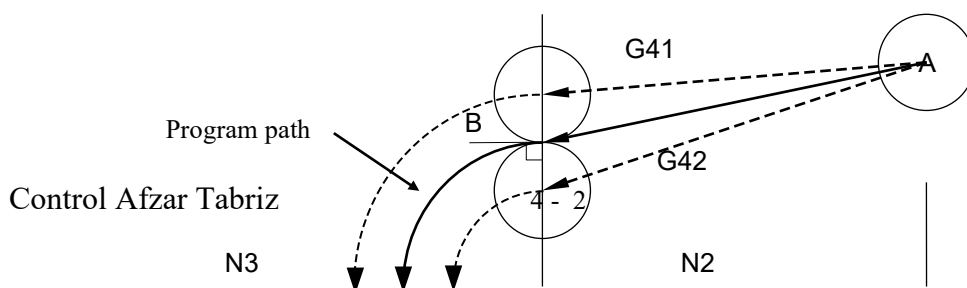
Start of Tool-tip Radius Compensation - 2
